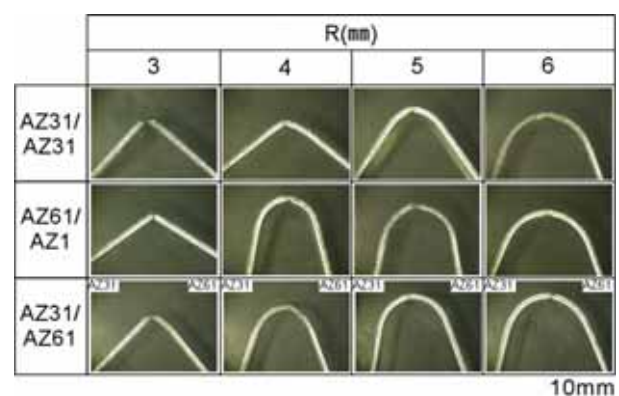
Appearances of roller bend test specimen with post heat treatment.
